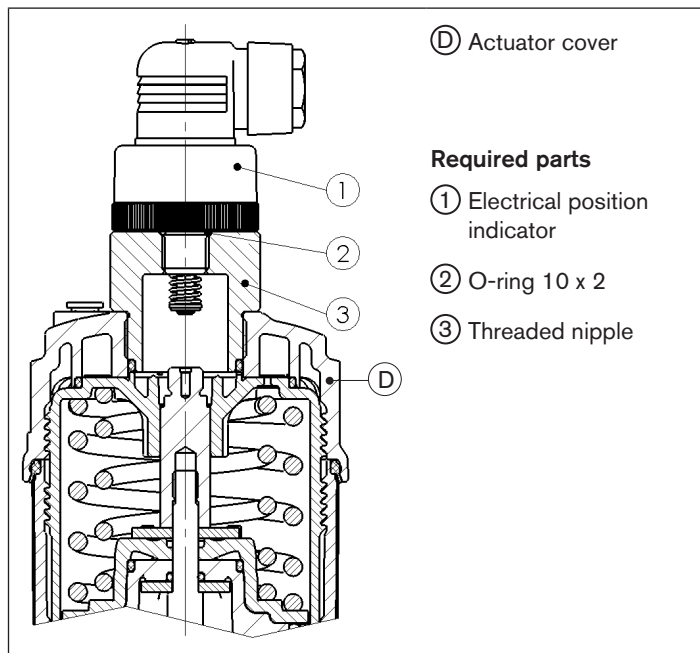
Actuators M (70), N (90) and P (130), electrical position indicator
